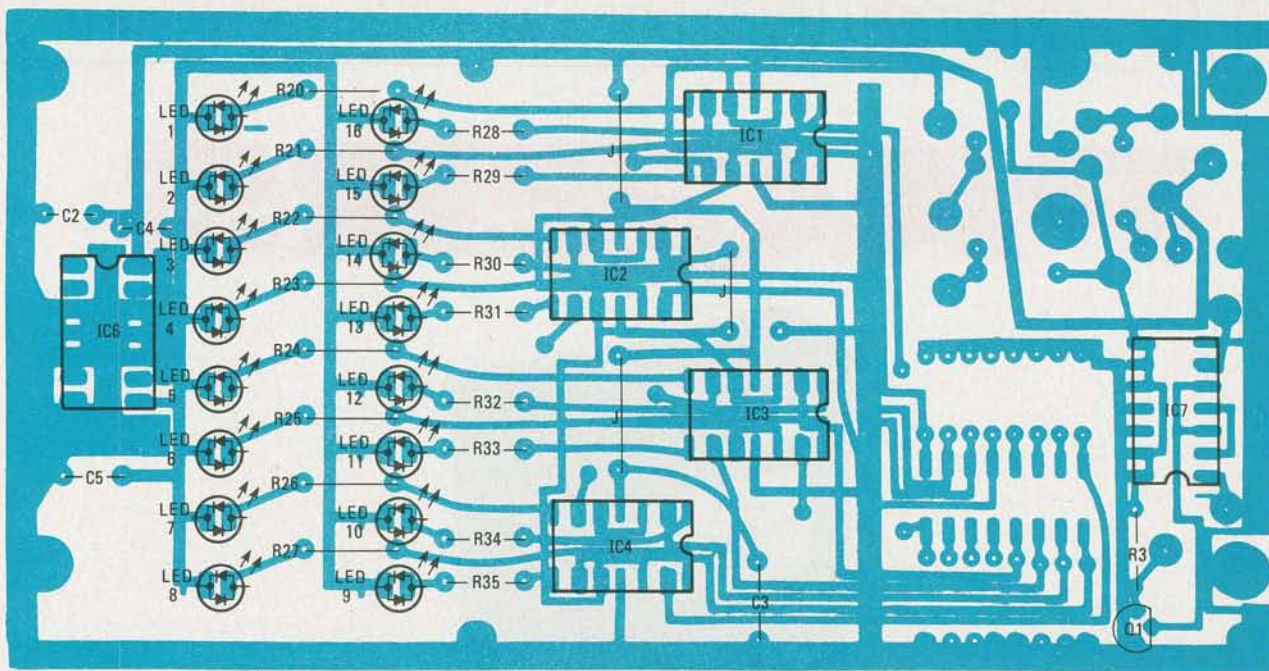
PARTS PLACEMENT on "component-side" of display board. Note that foil pattern shown is on side of board *opposite* the one on which components are mounted.
